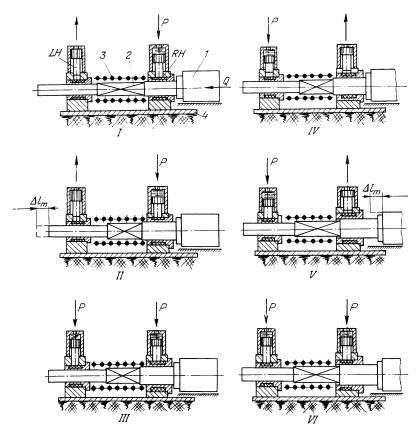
Magnetostriction drive combined with an "inchworm" unit: 1—unit to be traversed; 2—rod; 3—coil; 4—stationary part of the machine; LH and RH—left- and right-hand hydraulic clamps, respectively
